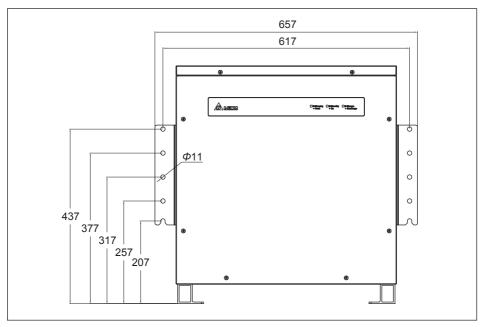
Mounting bracket dimensions ( Unit: mm )
